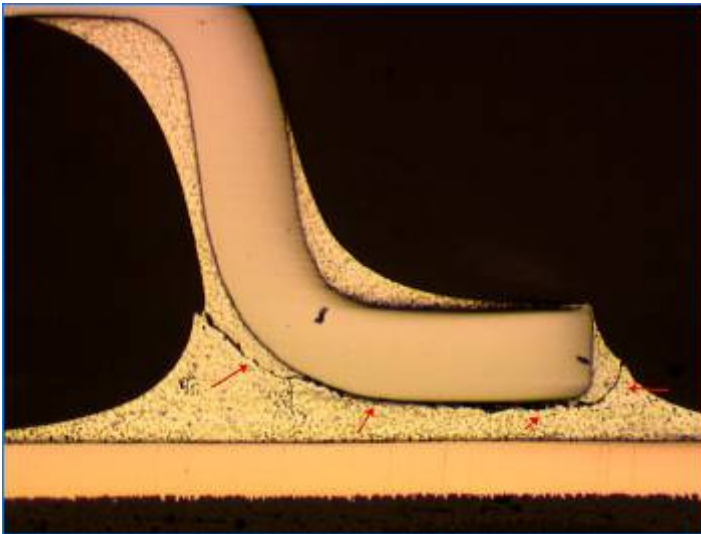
cross section, SN67, U62, right lead solder crack, 100x
